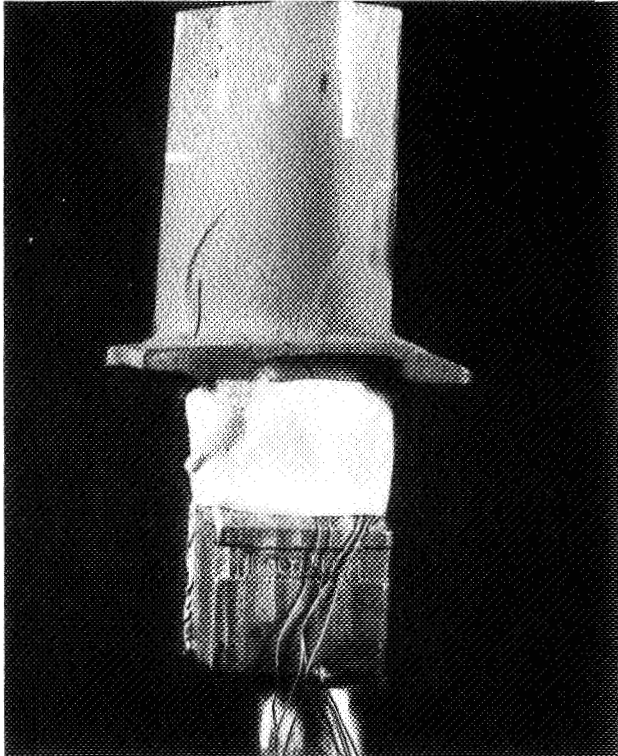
View of Assembled Embedded Thermocouple Instrumented Blade
